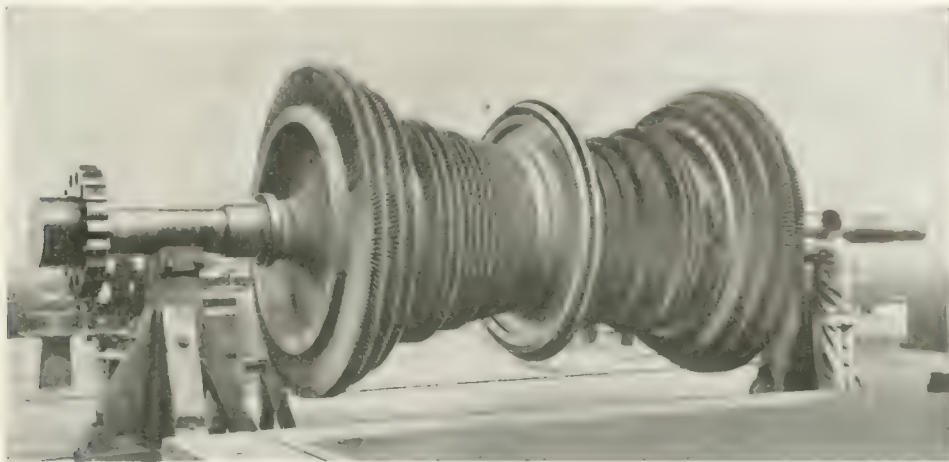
SPINDLE OF A 20,000 KW, 15,000 R.P.M. TURBINE
